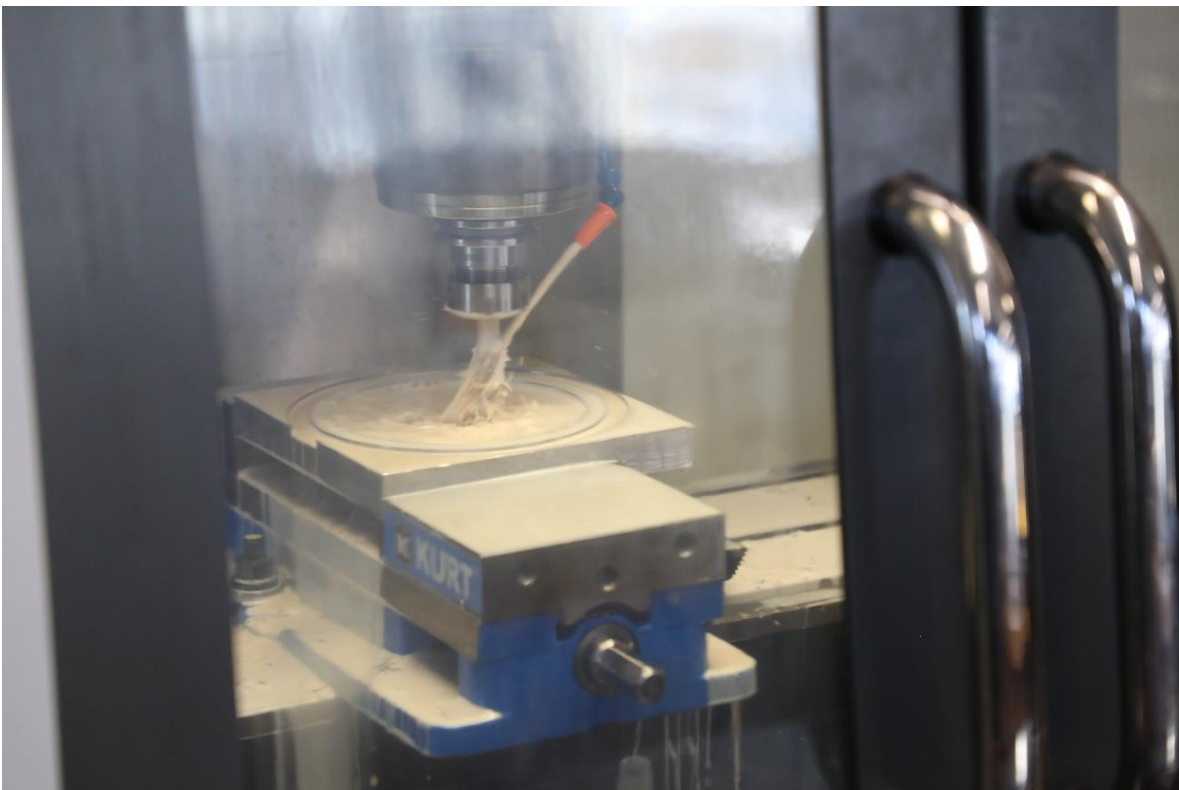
Machining stainless steel flanged connections with the Haas TM Series CNC vertical mill.
